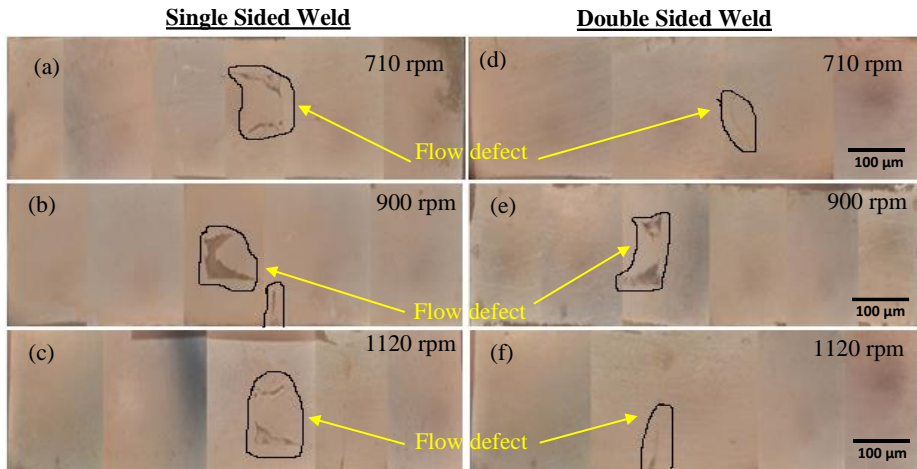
Macrographs of IFSW welds obtained at constant 40 mm/min and different rotational speeds: single-sided welds at (a) 710 rpm, (b) 900 rpm, (c) 1120 rpm, and double-sided welds at (d) 710 rpm, (e) 900 rpm, and (f) 1120 rpm
